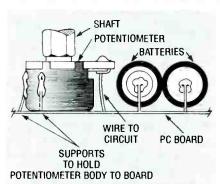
YOU MUST USE PIECES of bus wire to attach potentiometers R4 and R6 securely to the PC board.
